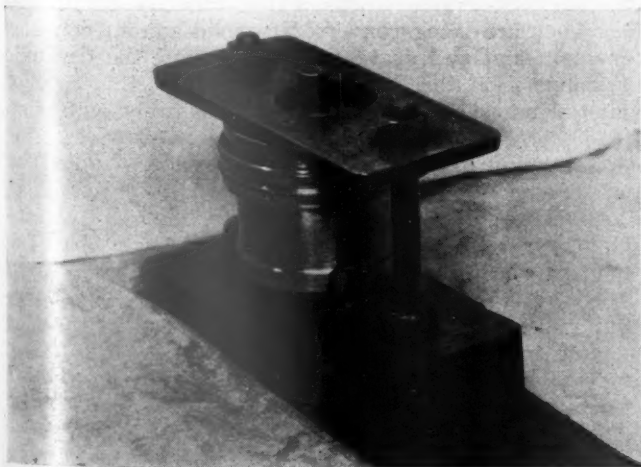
Foot-operated device for dismantling and assembling AB brake valve accelerator release piston springs
